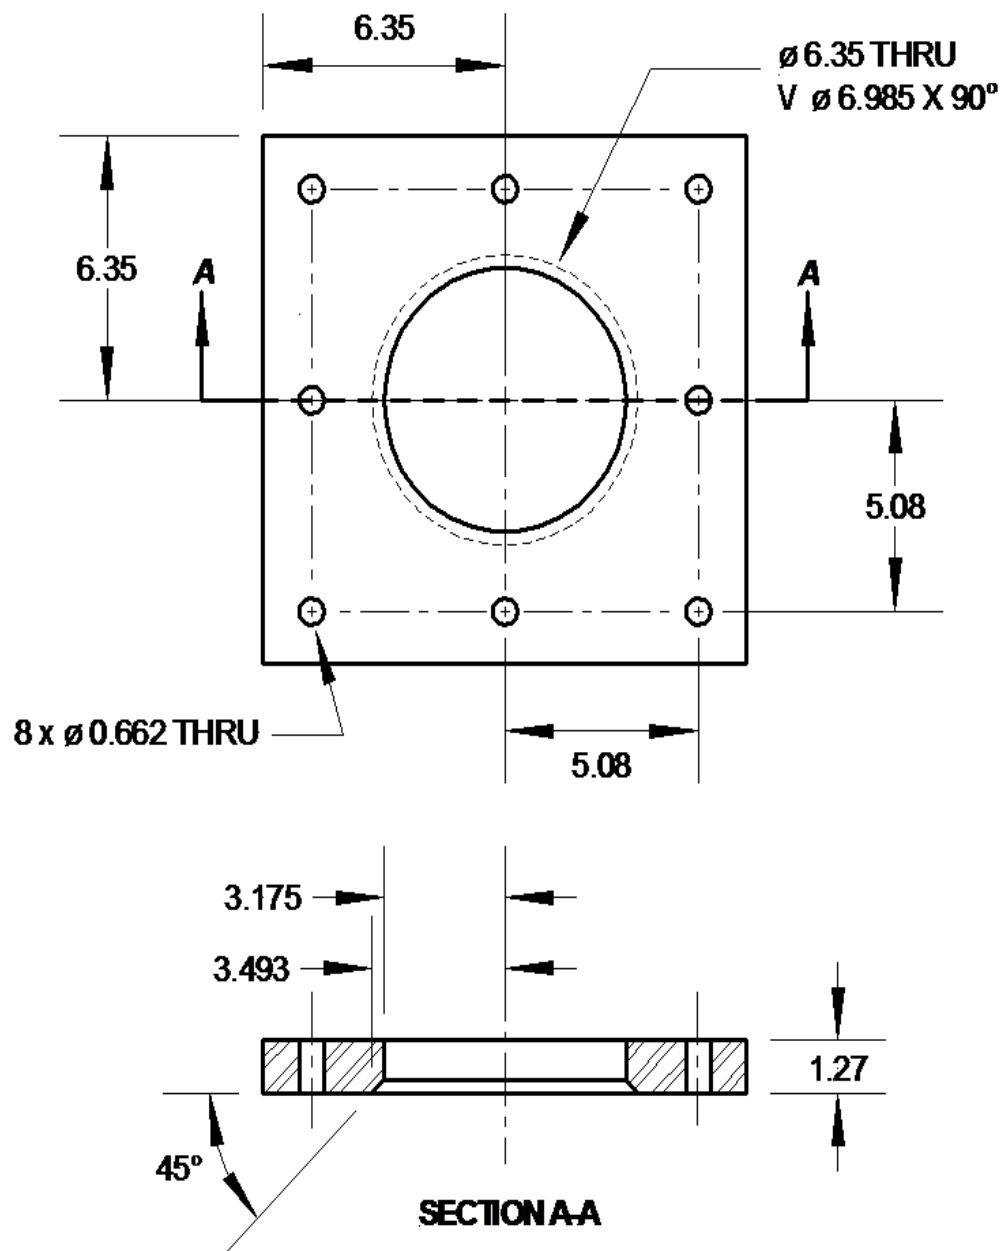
Top plate in the Dynatup plate specimen fixture assembly. The plate was machined from 304 stainless steel plate stock 1.27-cm thick. All dimensions are in *cm* unless otherwise specified.
